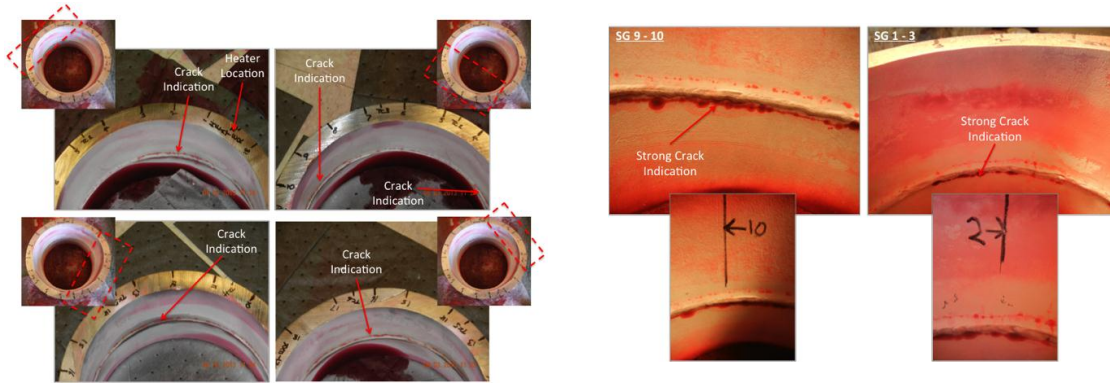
Dye Penetrant Testing Results on Weld ID.
